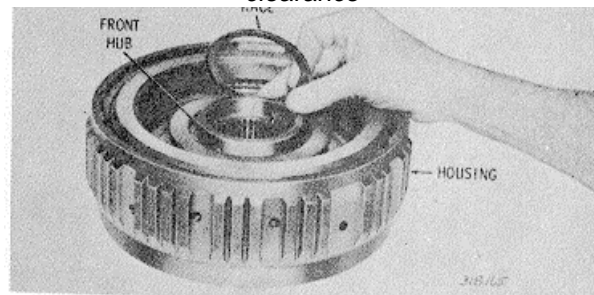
Removing (or installing) fourth clutch front bearing race
